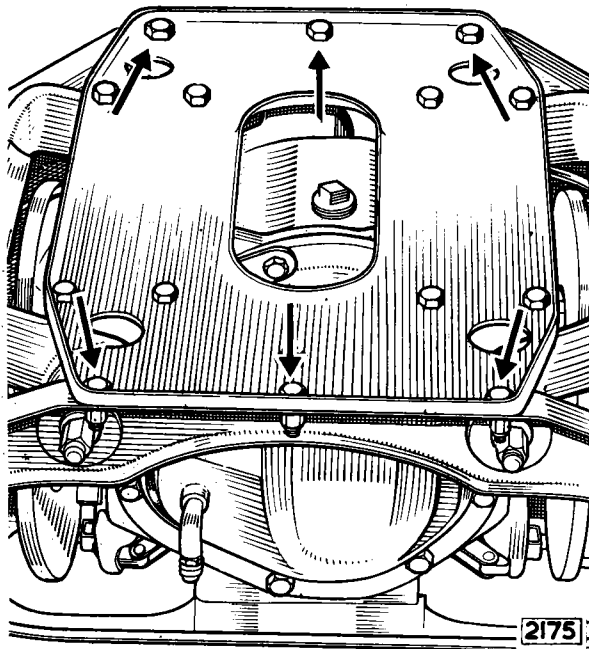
Showing the six bolts which secure the tie plate to the crossbeam
